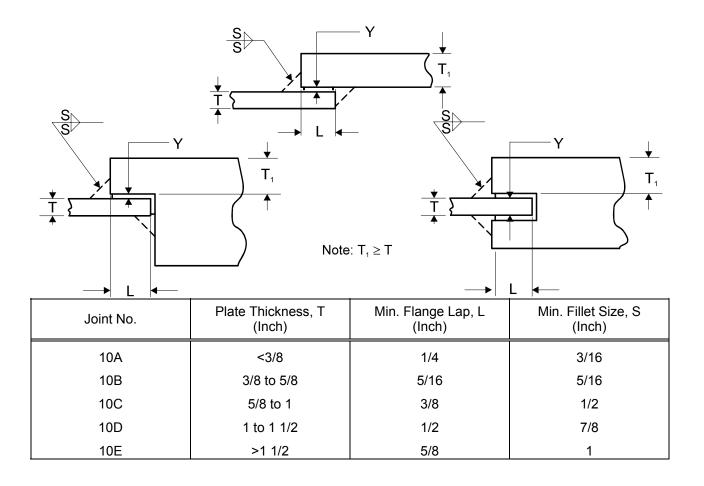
Type 10 Continuous Fillet Weld Ballistic Joint (see B3.7.2)
